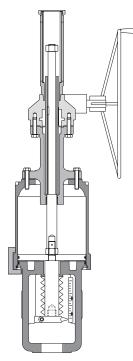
Top-mounted continuously connected handwheel mounted on a linear actuator. (*Courtesy of Valtek International*)
